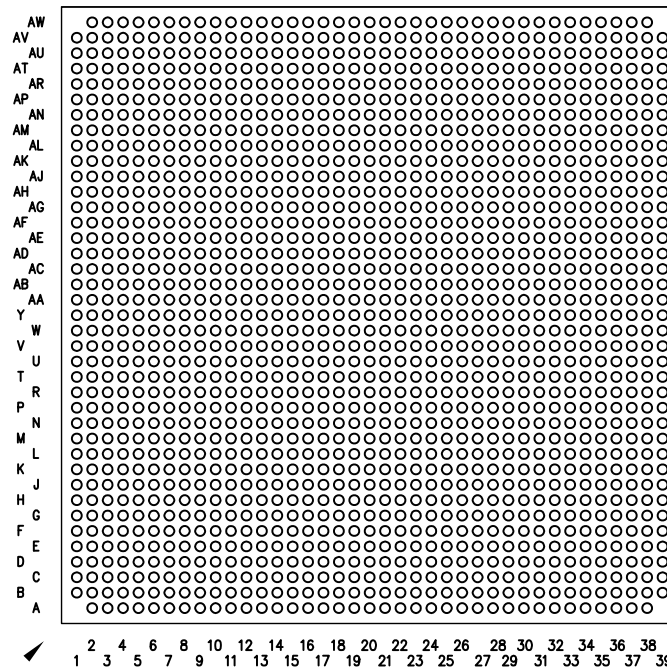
AAW 1517-Pin BGA Package (Bottom View)
